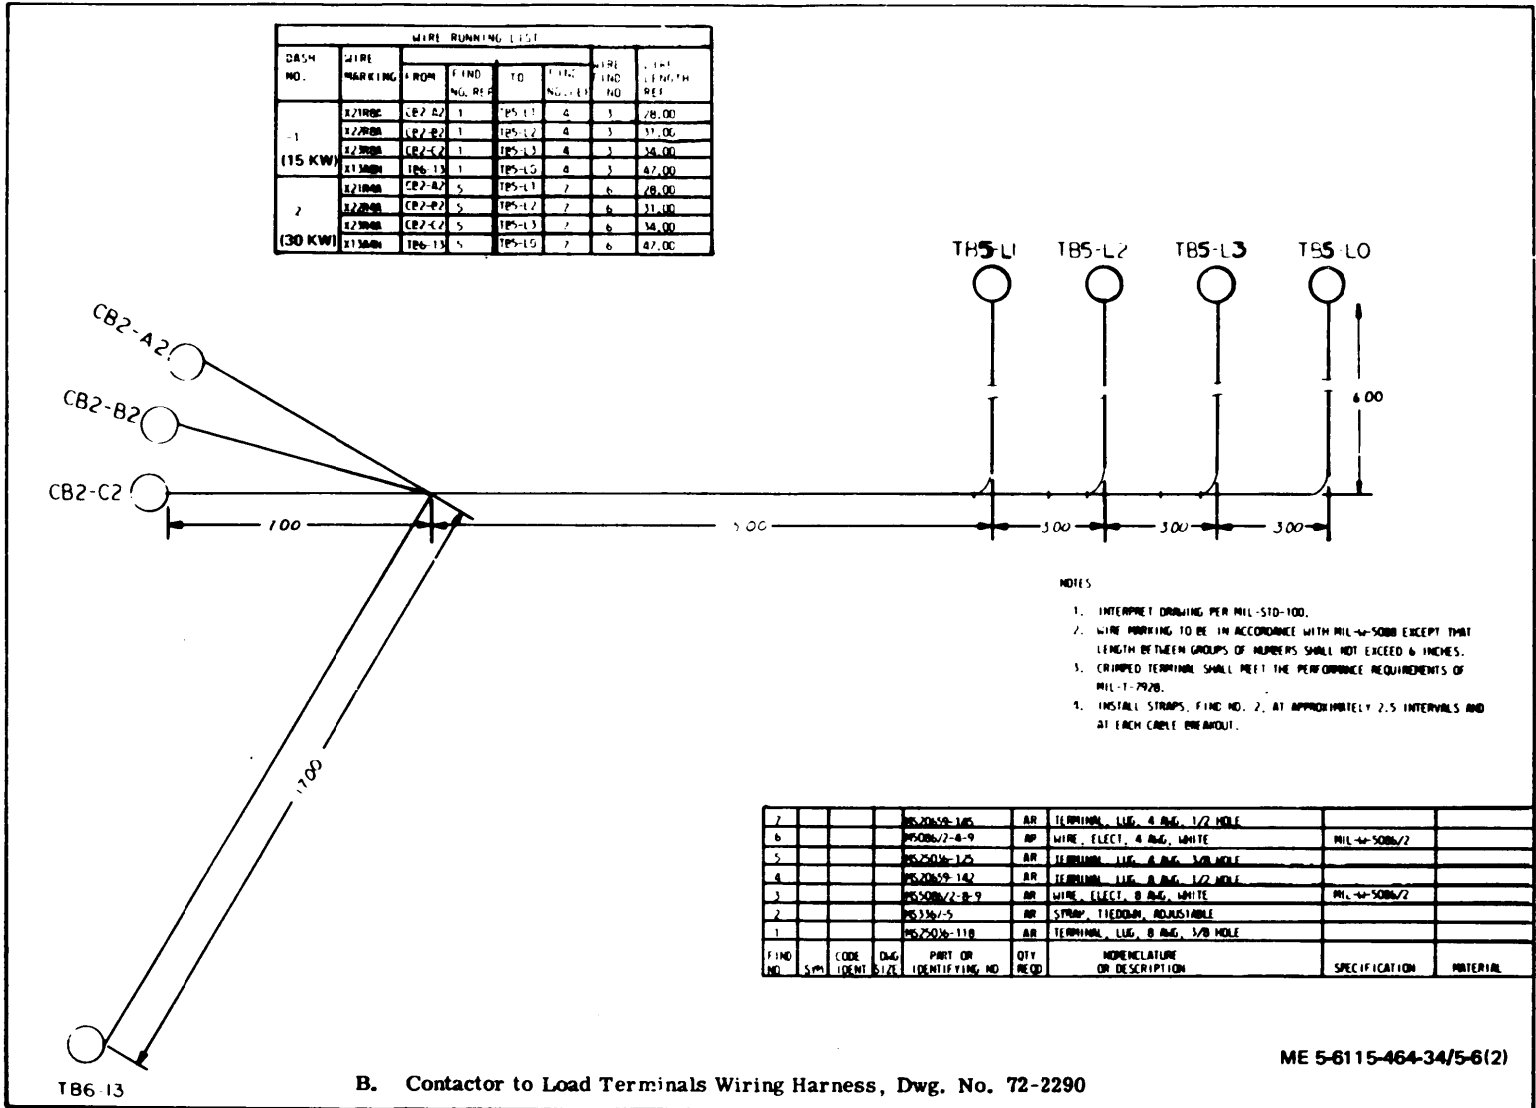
Main Load Contactor Schematic Diagram, Contactor to Load Terminals Wiring Harness, Dwg. No. 72-2290, and Contactor to Reconnection Board Wiring Harness, Dwg. No. 72-2225 (Sheet 2 of 3)
